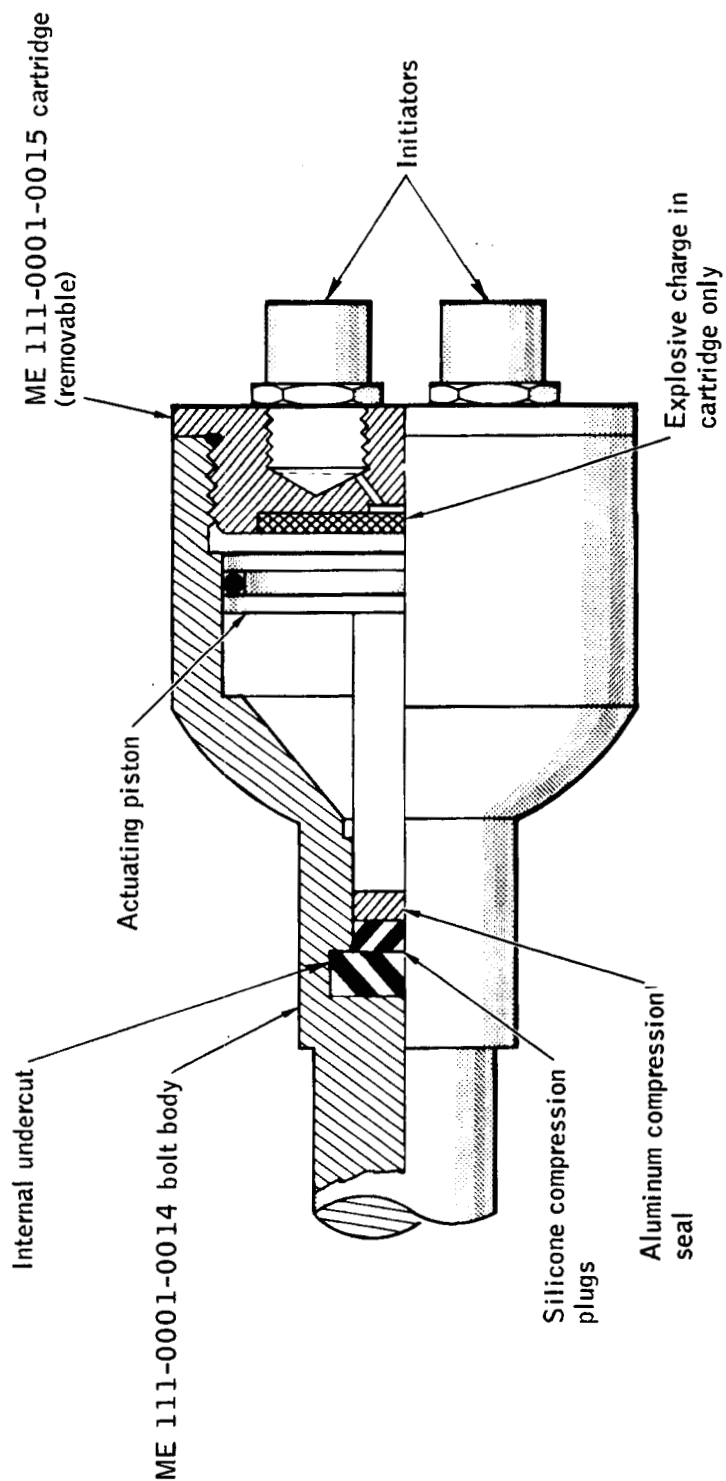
BP-15 spacecraft LES explosive bolt detail.
